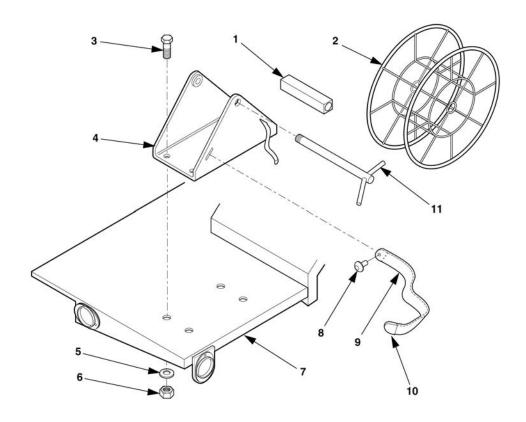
Reel, Cable and Bracket, Reel Maintenance.
